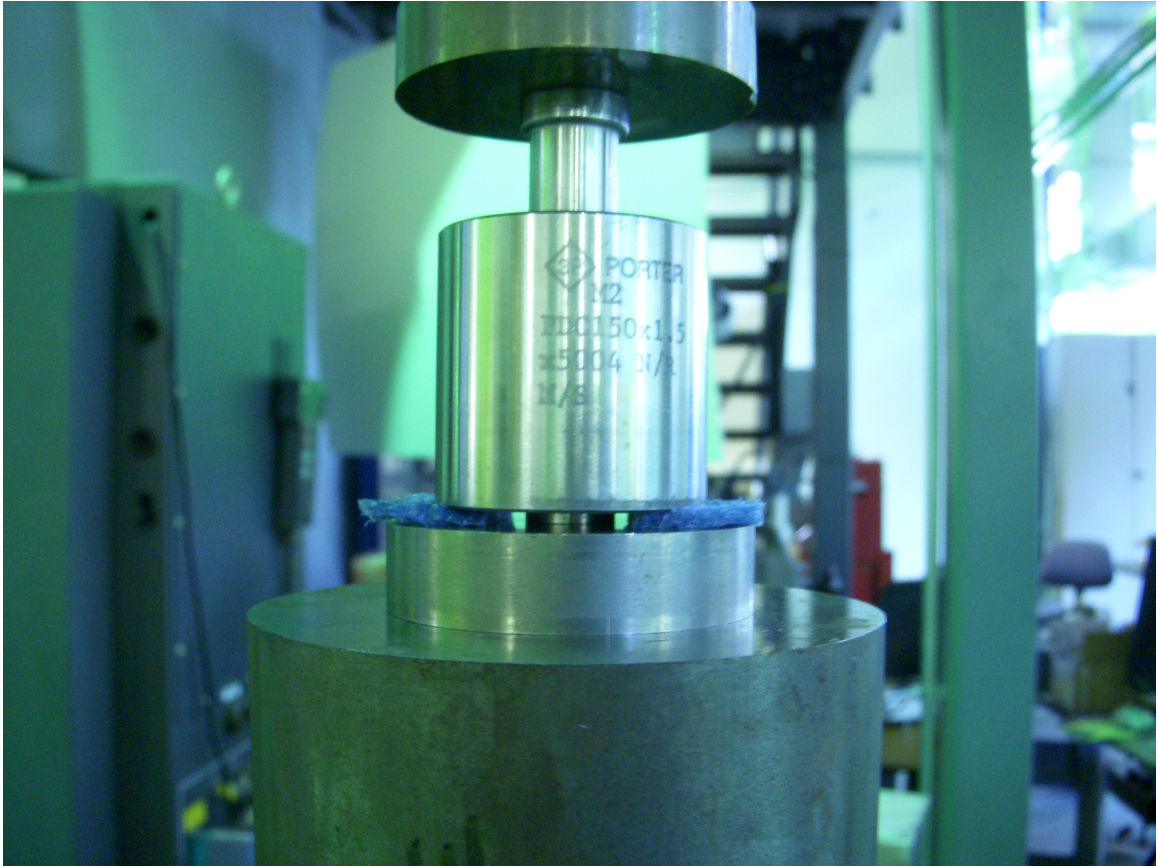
Powder Pressing Setup - Photo showing the punch and die situated between the platens of the testing machine. The plug can be seen extending below the bottom surface of the die to the bottom platen, and the foam pieces are clearly seen holding up the die. Once the loading cycle began, the pads were removed, allowing the die body to float.
